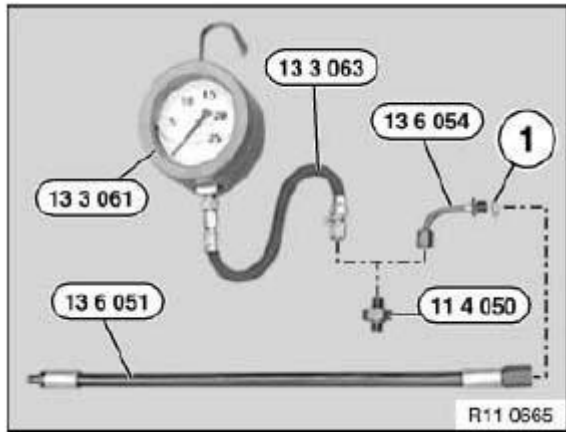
Checking Engine Oil Pressure Using Pressure Gauge
